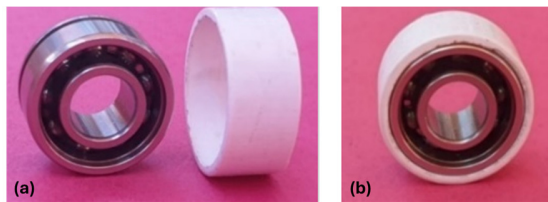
Bearing assembly states: (a) standard ball bearing without porcelain insulation and (b) ball bearing integrated with a porcelain insulation sleeve.
